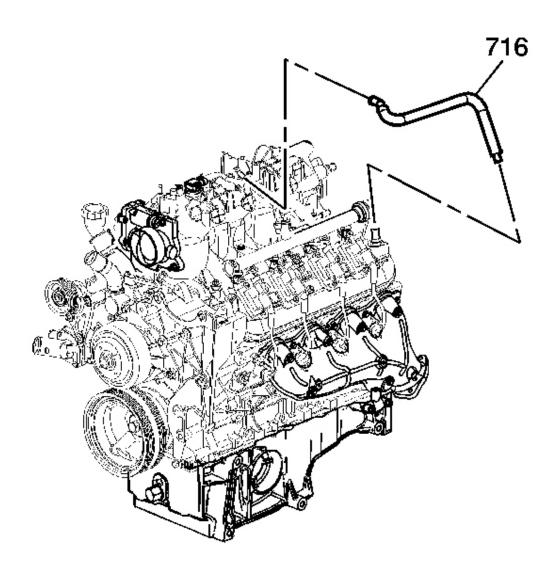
PCV Hose Courtesy of GENERAL MOTORS CORP.
